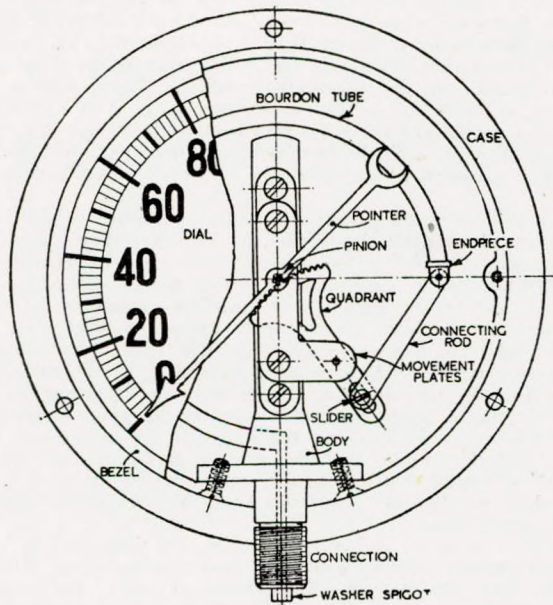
B.—Ordinary bourdon tube pressure gauge.
